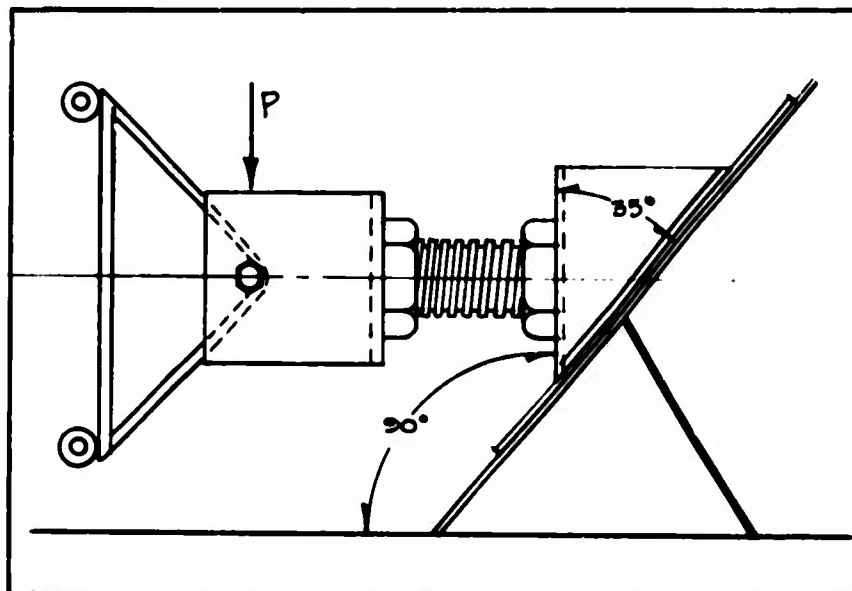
Base Pad Main Adjustment Screw Test Set-Up
